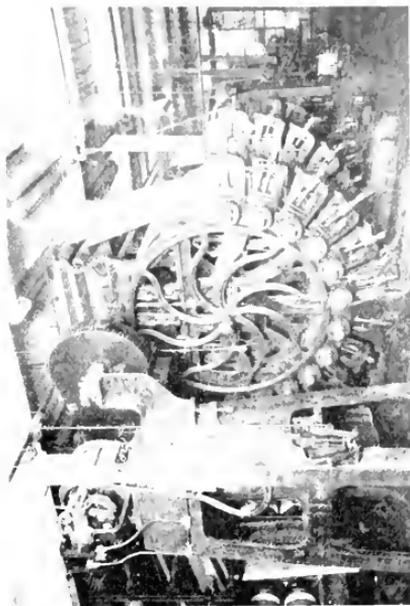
BTS 40 h.p., 1200-r.p.m., 550-volt Motor semi-automatic control Two-color Press, Barton & Fales Printing Frame and Motor Stand Chain Drive Greenville Finishing Co., Greenville, R. I.
